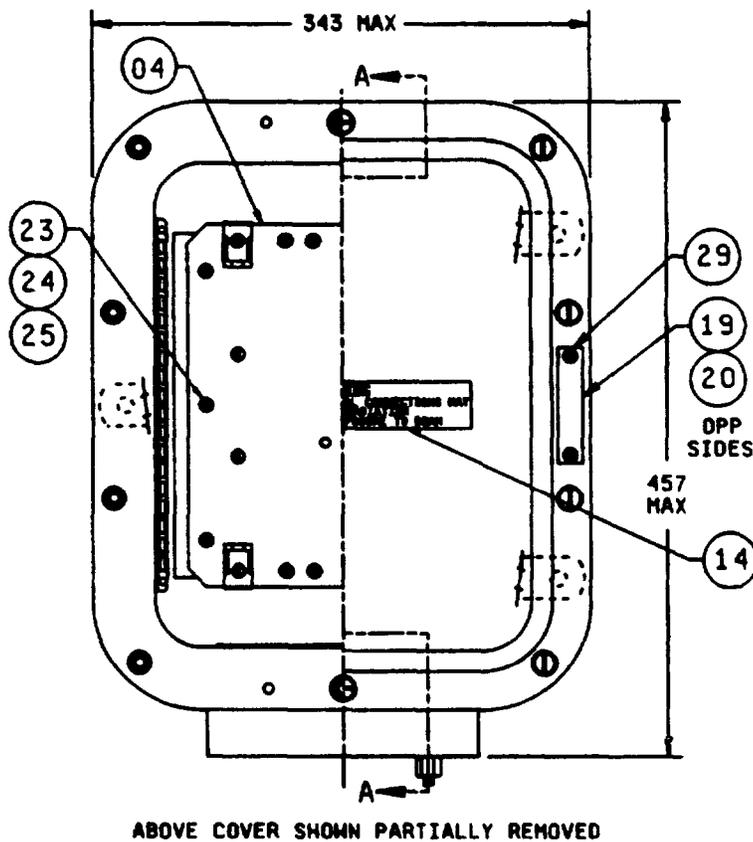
Enclosure assembly, M24728/1 005 and M24728/1-006
